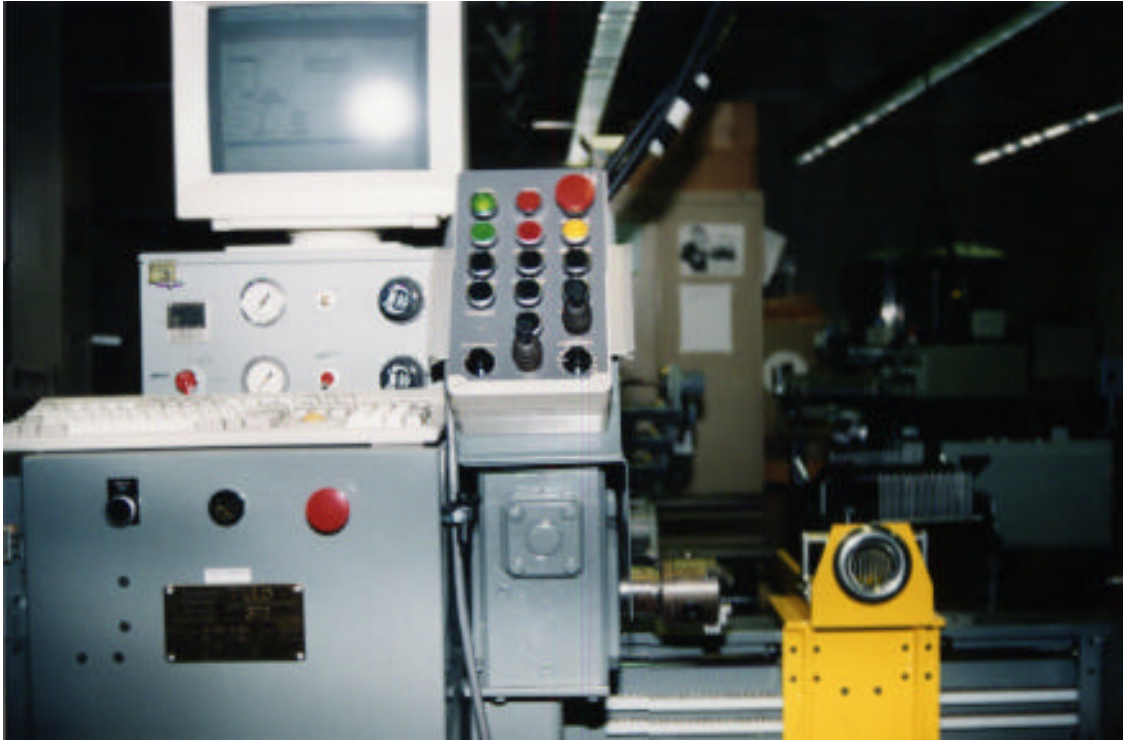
Photograph of the on-line consolidation head assembly.
